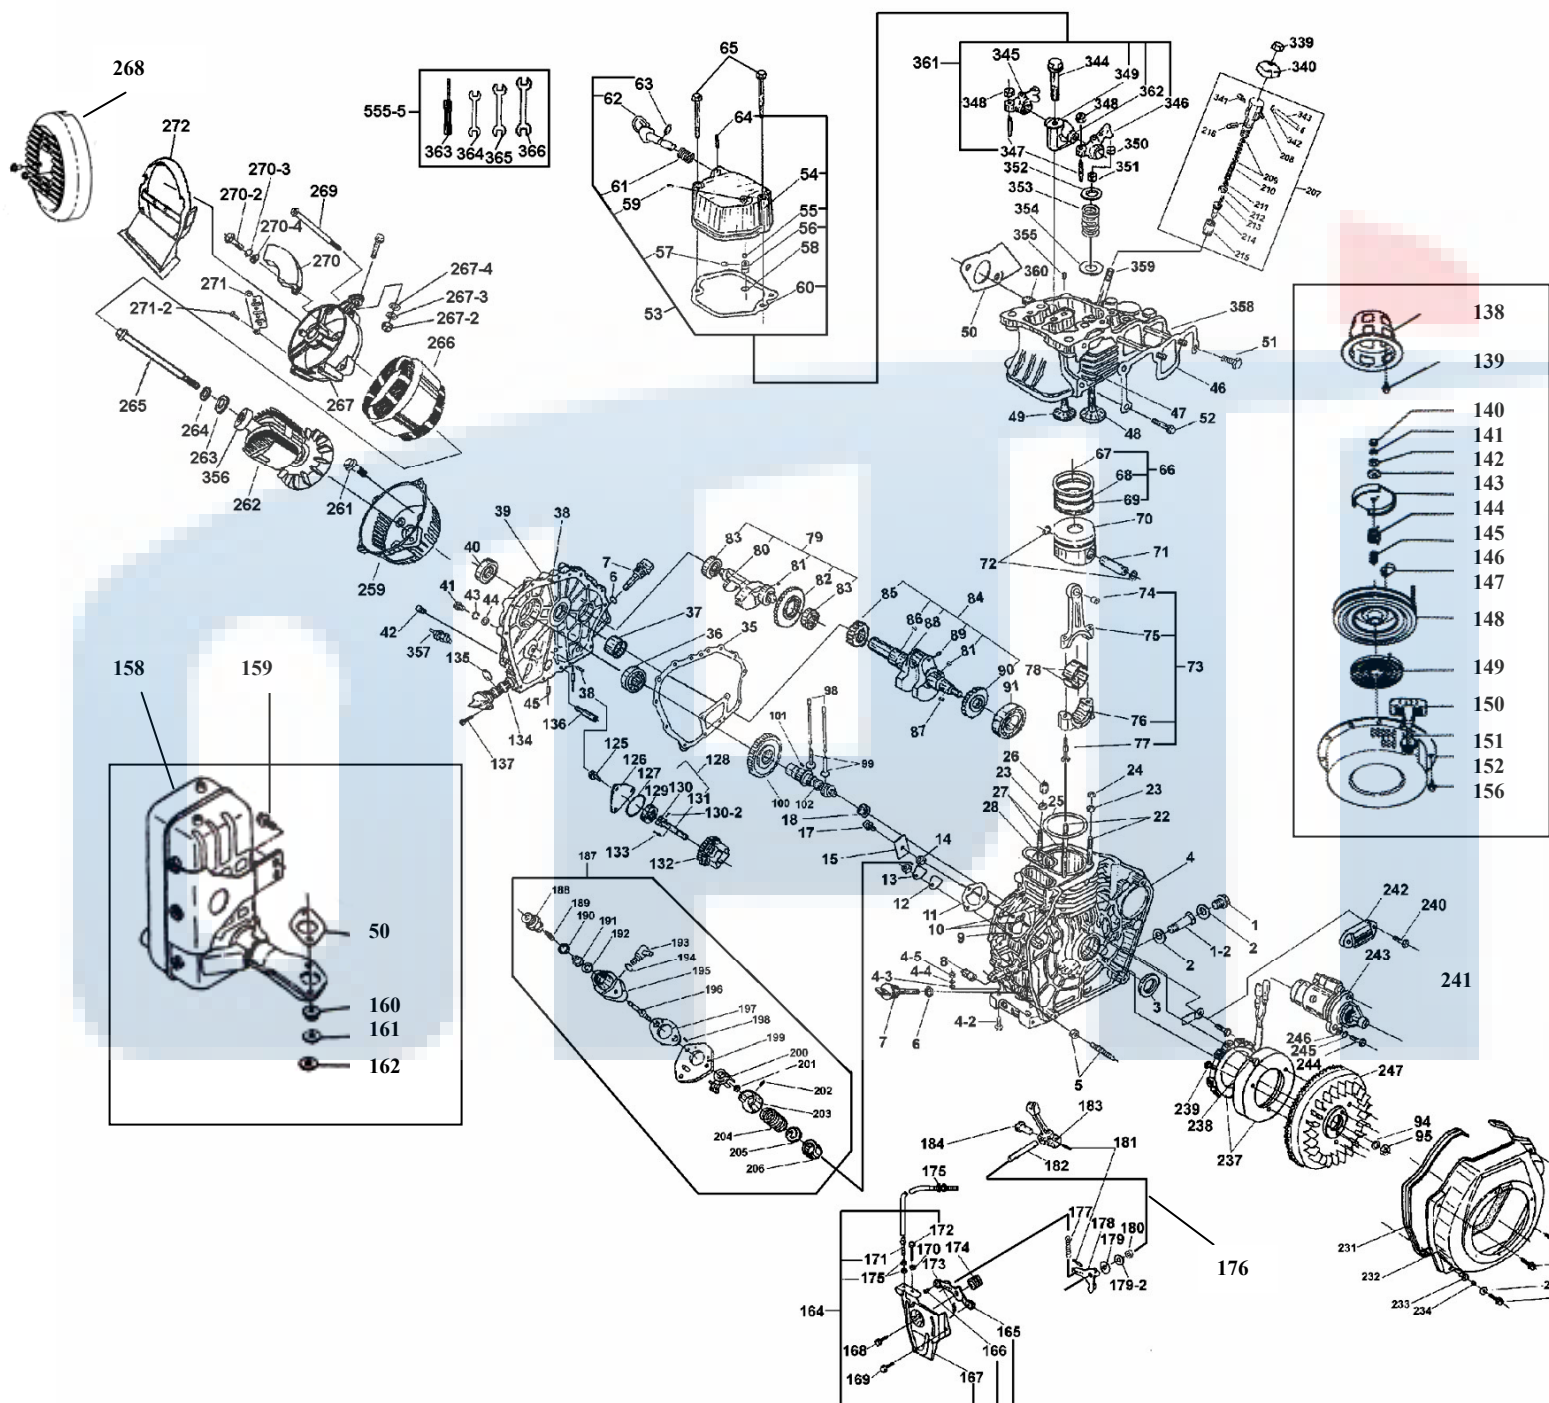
Exploded view of frame assembly for 4000DE and 6800DE
